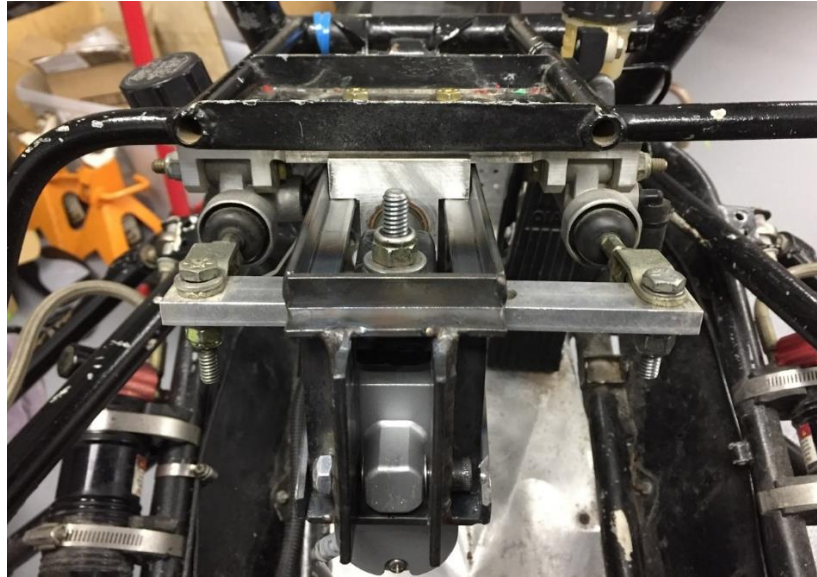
View of the Linear Actuator Mount from the Driver's Seat
